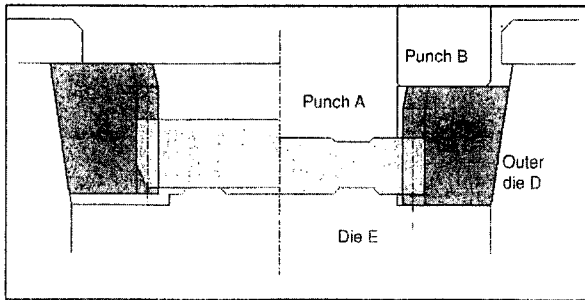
Principle of net shape cold forging process for forming helical gears with crowned teeth [6]
